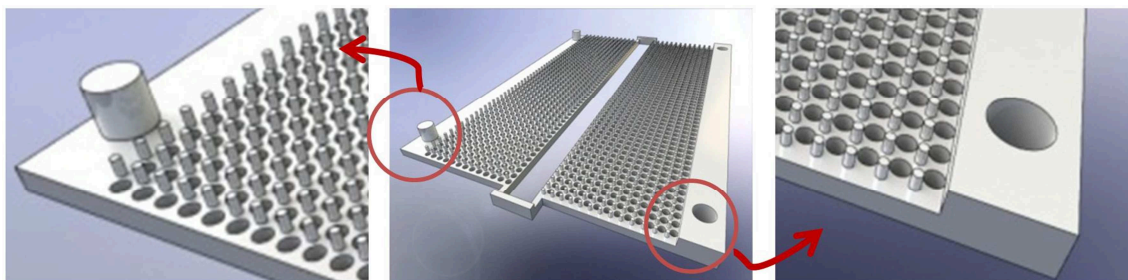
3D-printed grips to hold samples for pure shear test.
